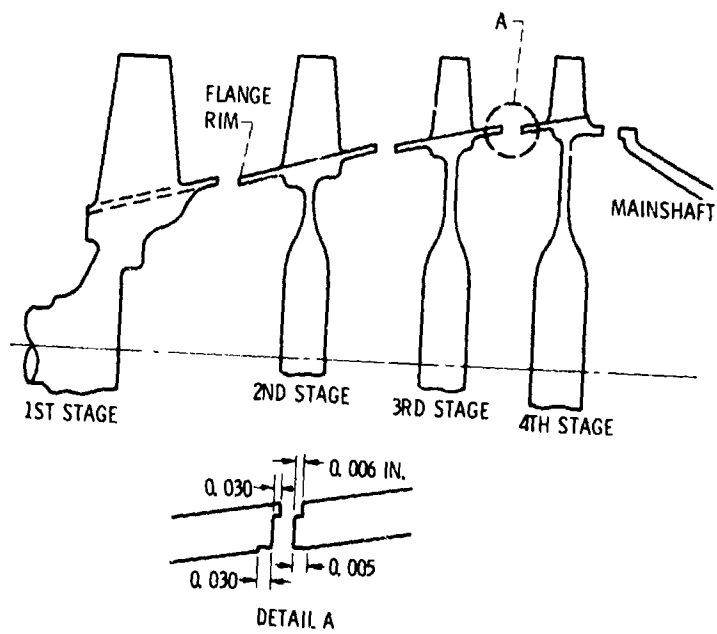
Cross-sectional view of compressor rotor stages prior to welding.
